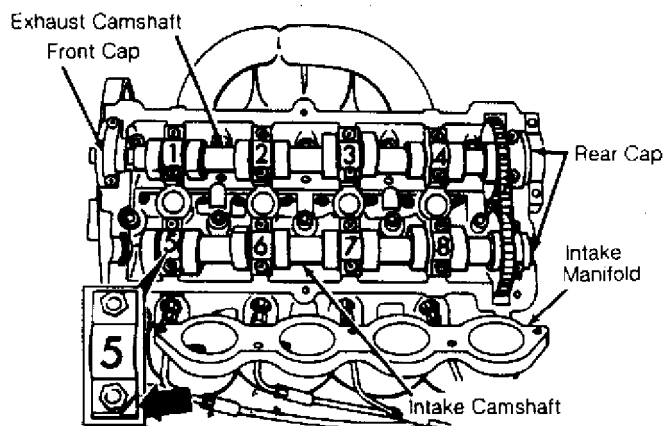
Identifying Camshaft Bearing Caps (2.0L)
